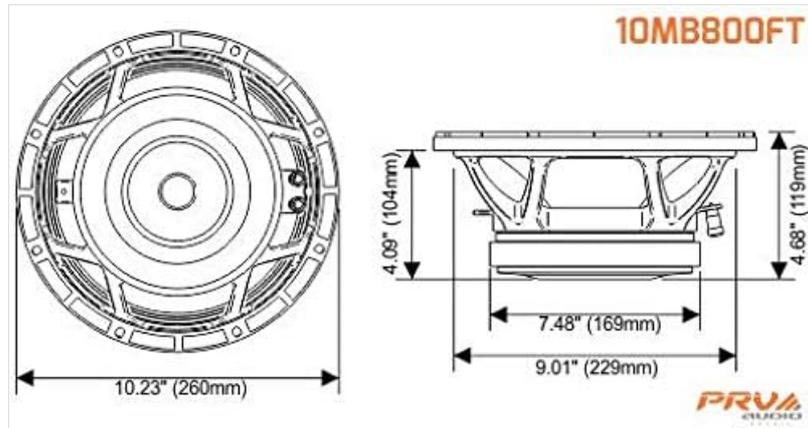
Technical drawing showing the dimensions of the 10MB800FT speaker, including mounting and overall size.
